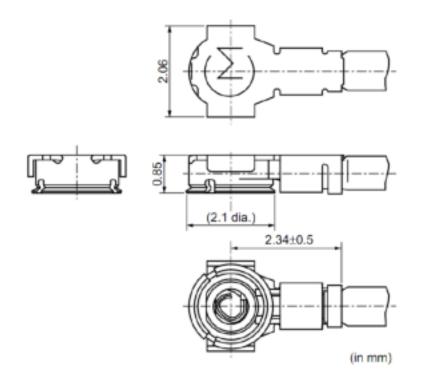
Dimensions of Mated Plugs (Ø 0.81 Coaxial Cables) (Unit: mm)
